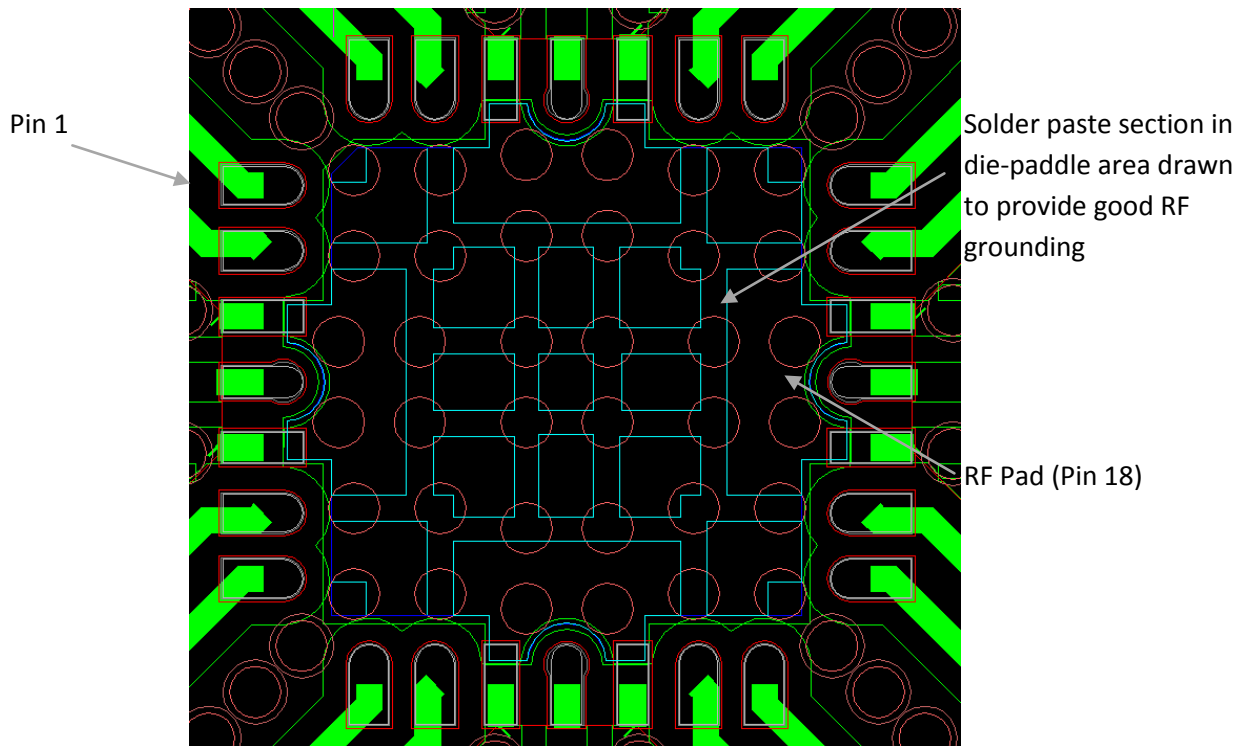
Sample PCB footprint for a 7x7/28L Endwave QFN
